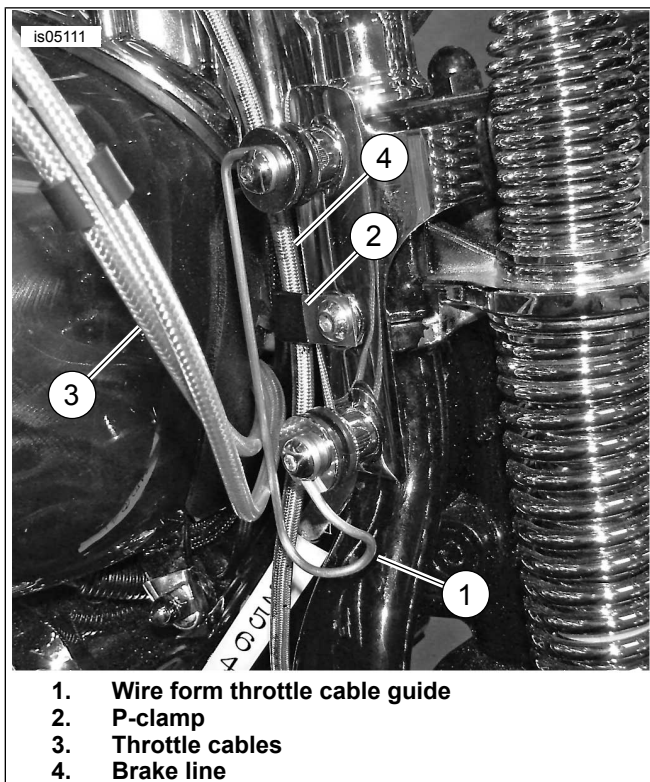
Throttle Cable Guide (FXSTSSE and FXSTSSE2)
